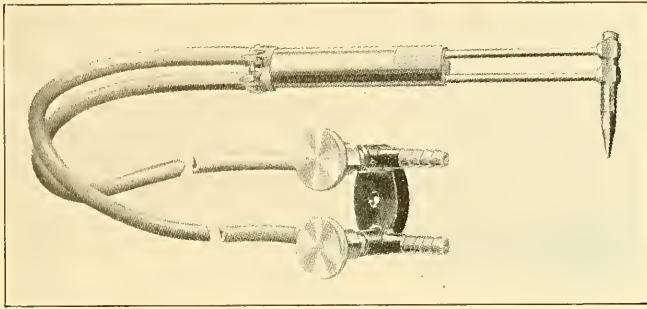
The Oxweld Welding Torch Model G.
